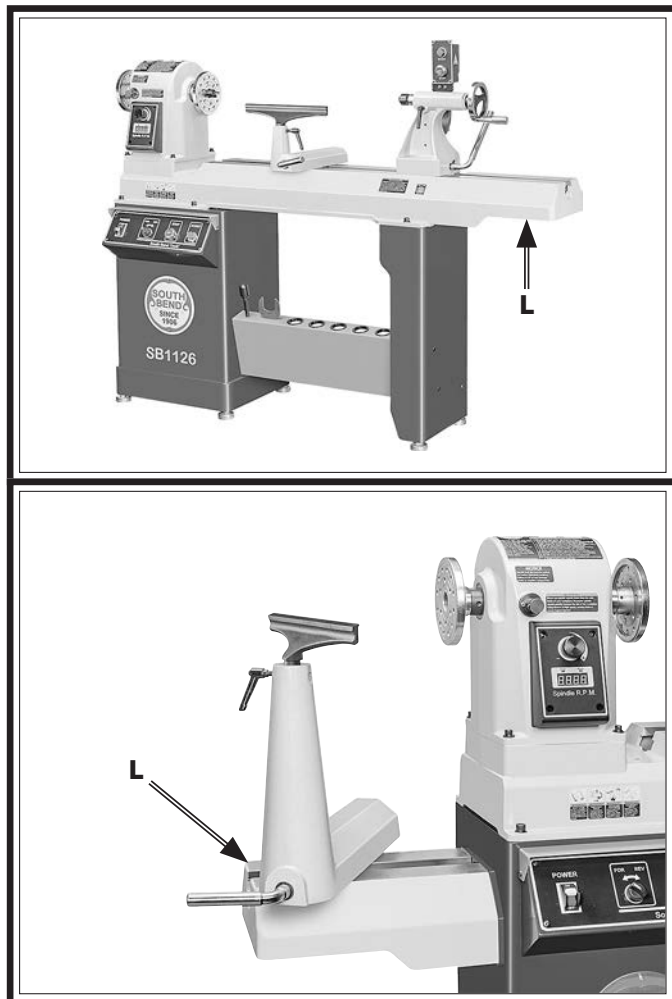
Bed extension installed in inboard and outboard positions (shown with optional SB1129).
